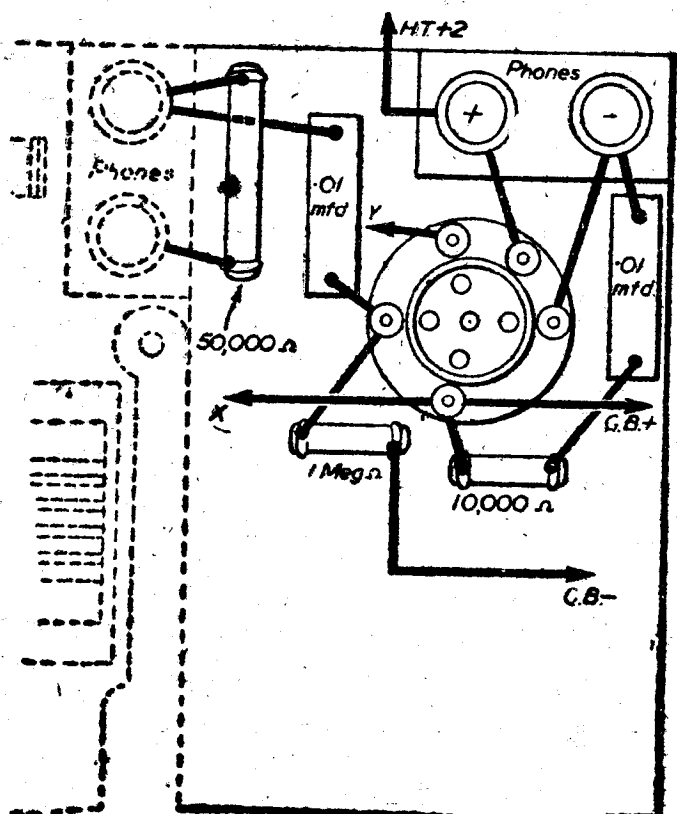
The layout and wiring of the parts for the L.F. stage, the valve being an L.F. pentode.
